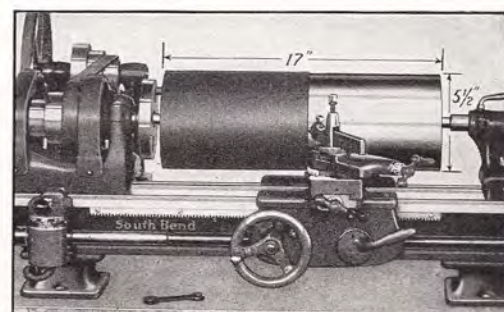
9" x 3' "Workshop" Lathe takes work 5 1/2 inches in diameter and 17 inches long over the tool carriage.
